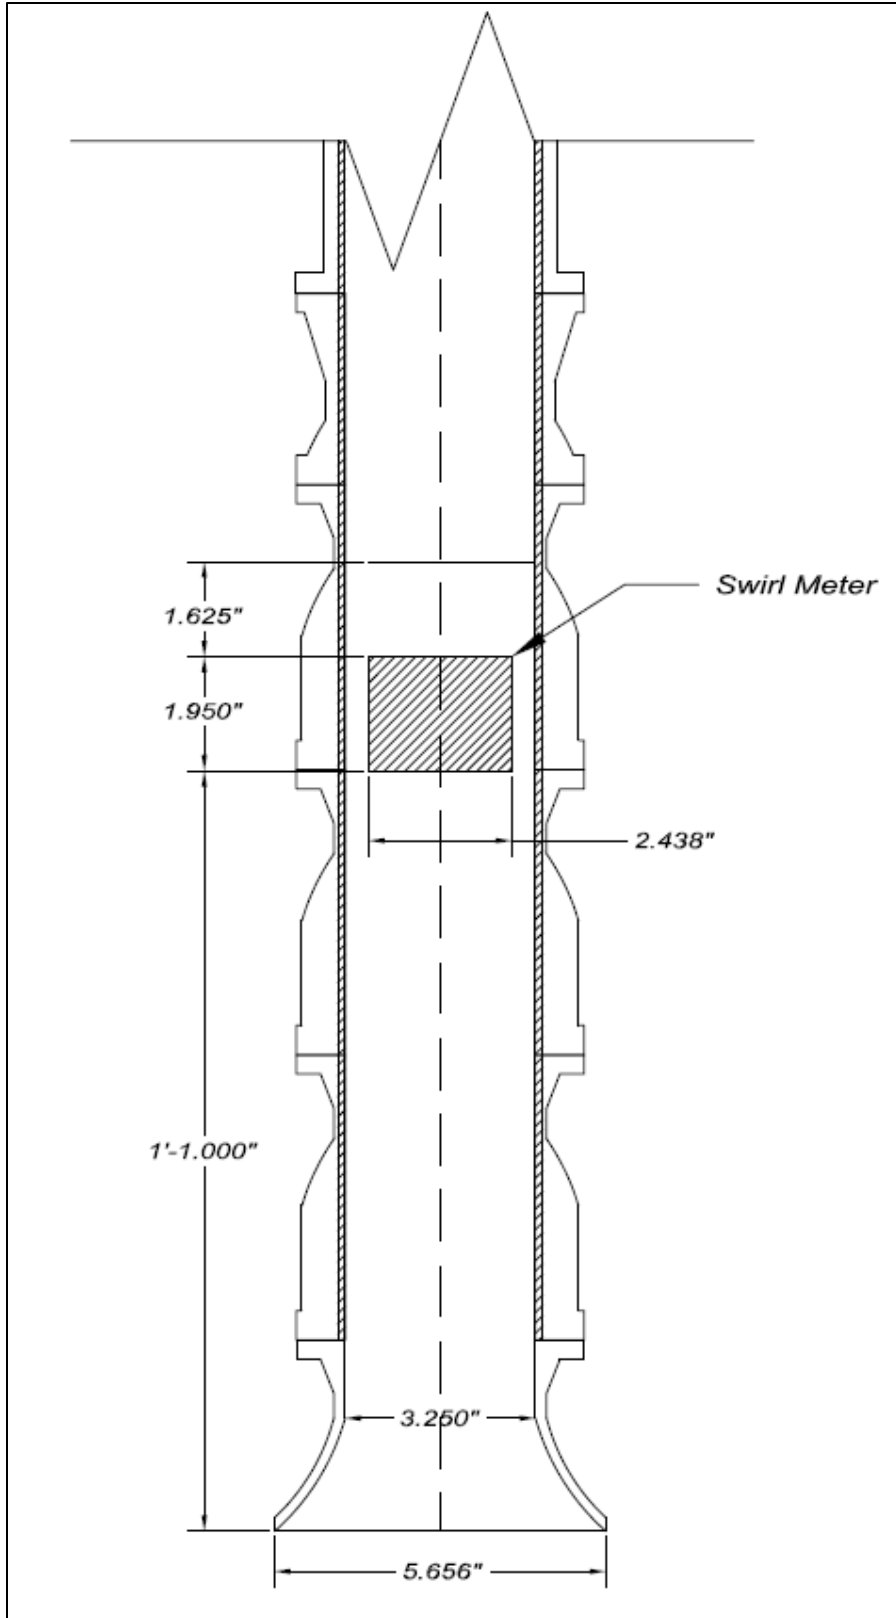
Section-view of the large pump bell geometry and model dimensions used in the physical model.
